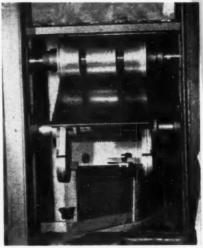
The outside casing is nearly ready to be removed from the forming machine.
